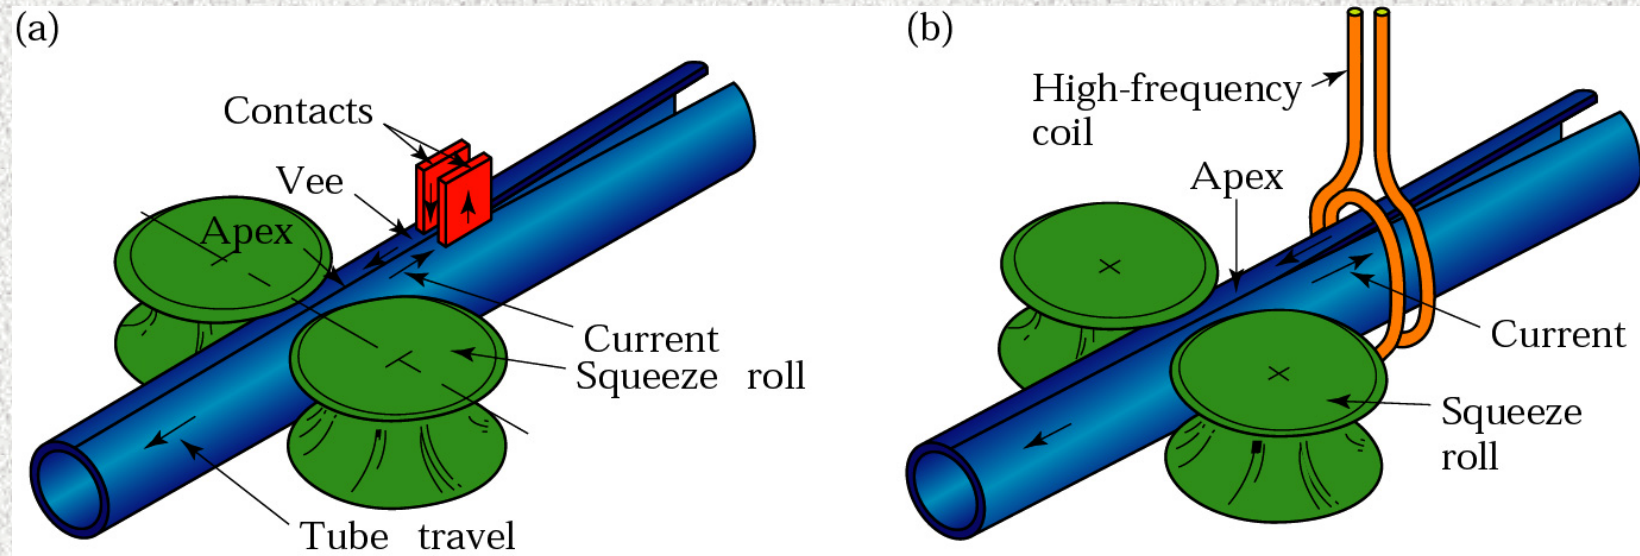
Two methods of high-frequency butt welding of tubes.
